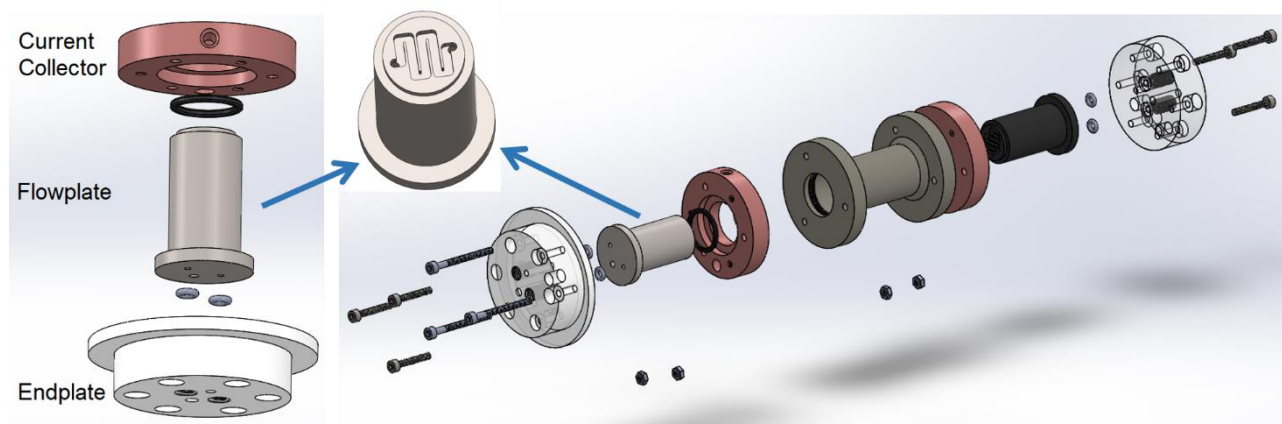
Left: Exploded view of the anode flowfield. Right: Exploded view of the whole cell. The insert shows the flowplate with the single-channel serpentine.
